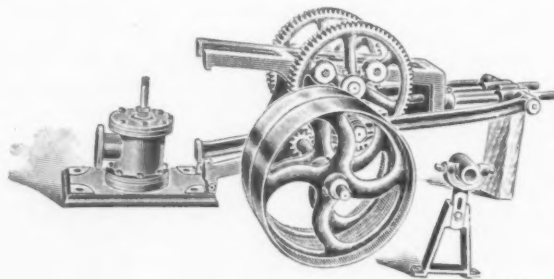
Head Hinged Backward to Get at Rod and Valves.
